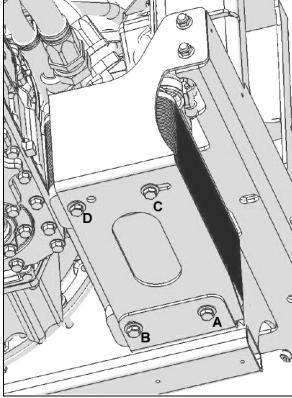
COOLER POSITION DURING ENGINE CRADLE INSERTION OR REMOVAL
